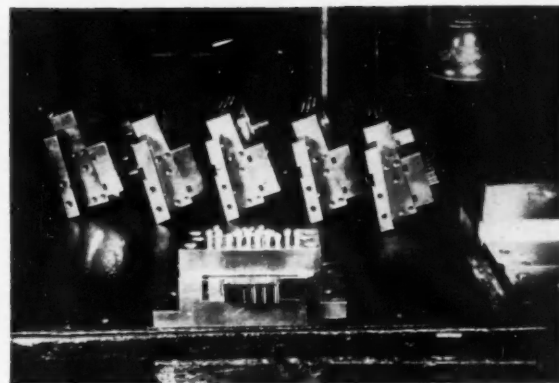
Tool block with tools set for machining fins on cylinder barrel.
